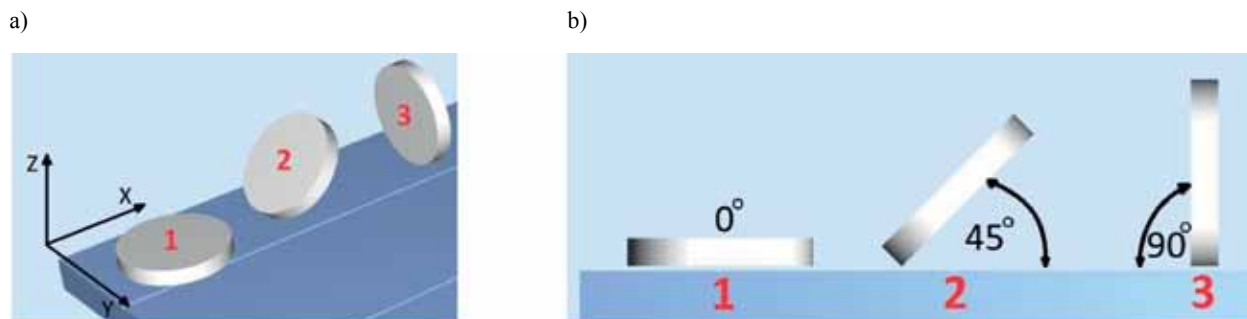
Positioning of the specimens on the 3D printer virtual worktable: (a) arrangement of specimens, (b) print directions used: 1 – 0° printout, 2 – 45° printout, 3 – 90° printout
